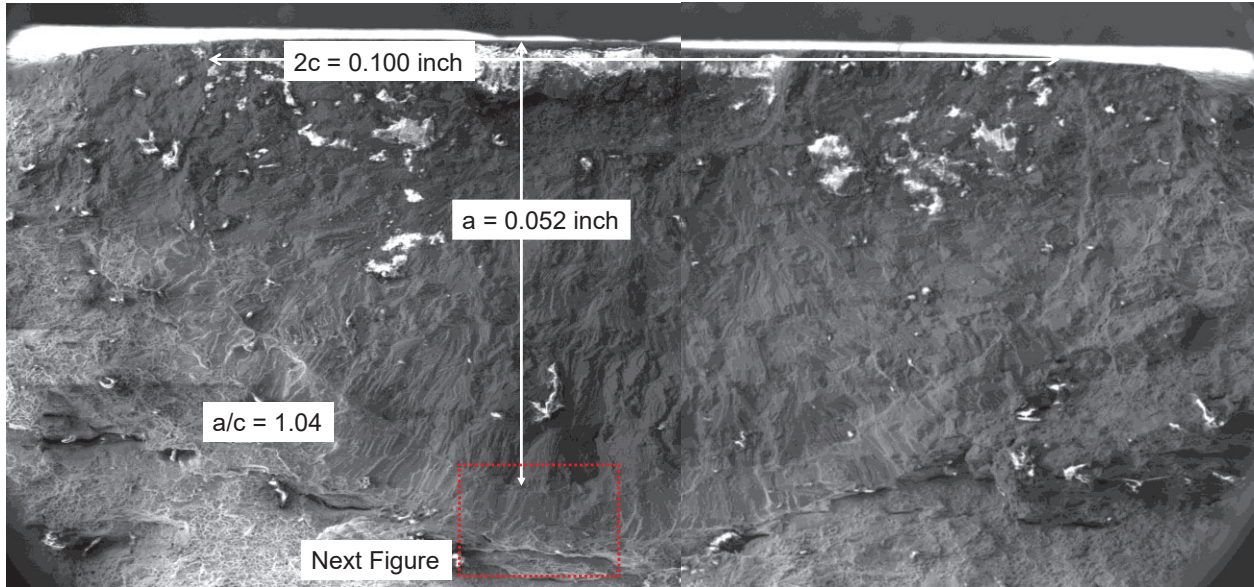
Fracture surface at the maximum depth location for the LEFM-only test UL-P0-08 (LEFM: -40,000 psi to 25,000 psi).
